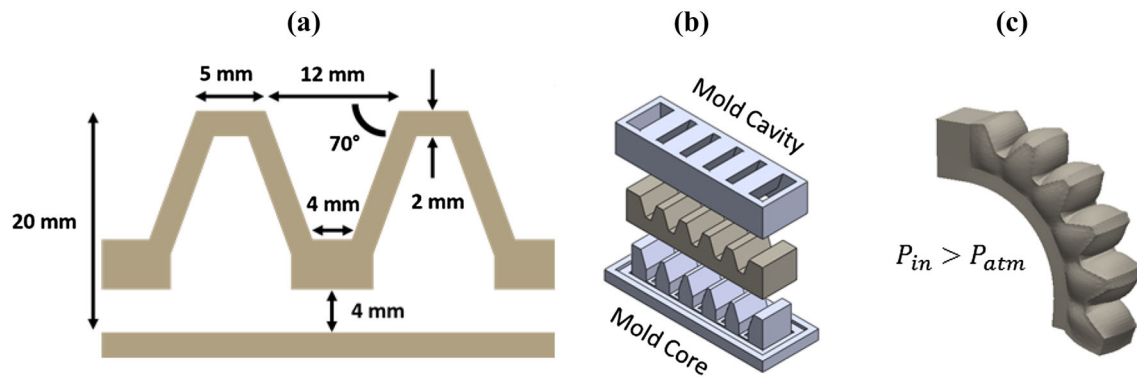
Design approach for the soft actuator and mold parts. a Cross-section of the SPA with the corresponding dimensions; b core and cavity sides of the 3D printed mold; c inflation state of the SPA
